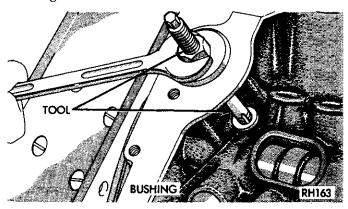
Removal Distributor Driveshaft Bushing (Tool C-3052)
